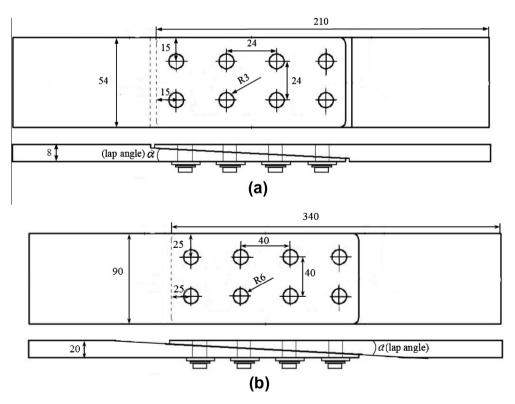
Specimen diagram (Unit: mm): (a) 8 mm-thick, (b) 20 mm-thick.
